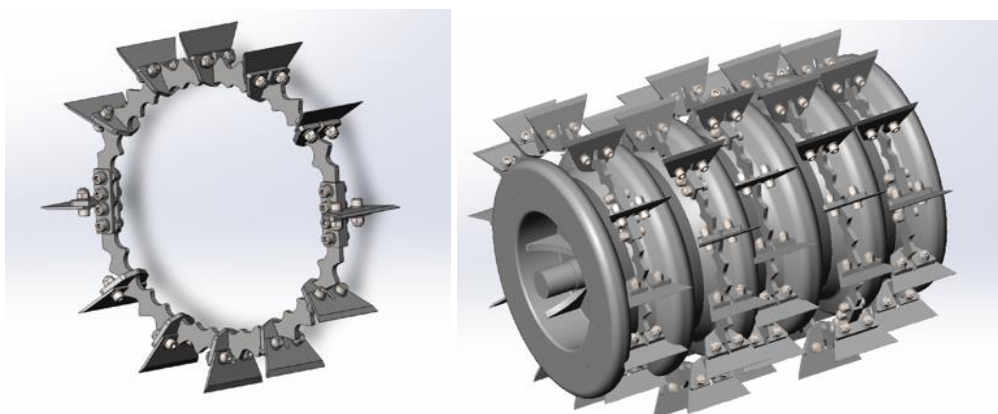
floating stainless-steel ring (left), and rings mounted on rubber roller (right)
